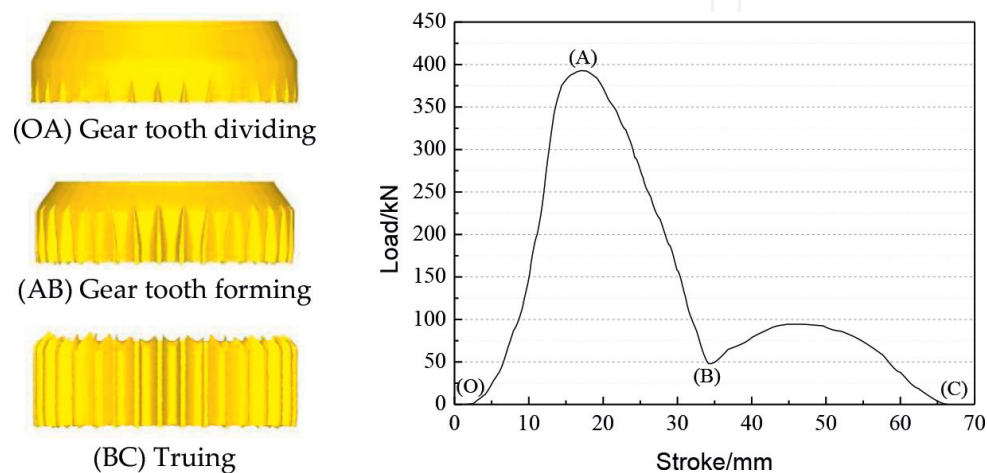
The process model of open-die warm extrusion of spur gear.
